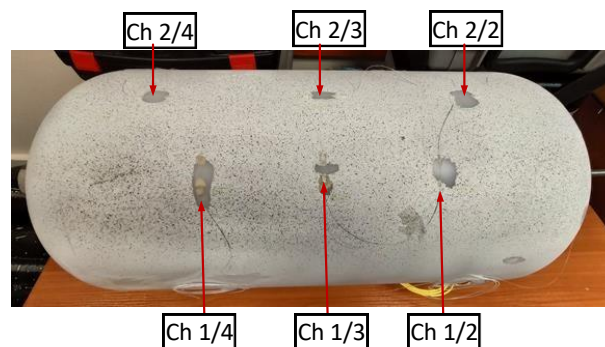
View of the liner a) with surface installed FBG sensors and DIC speckle pattern
